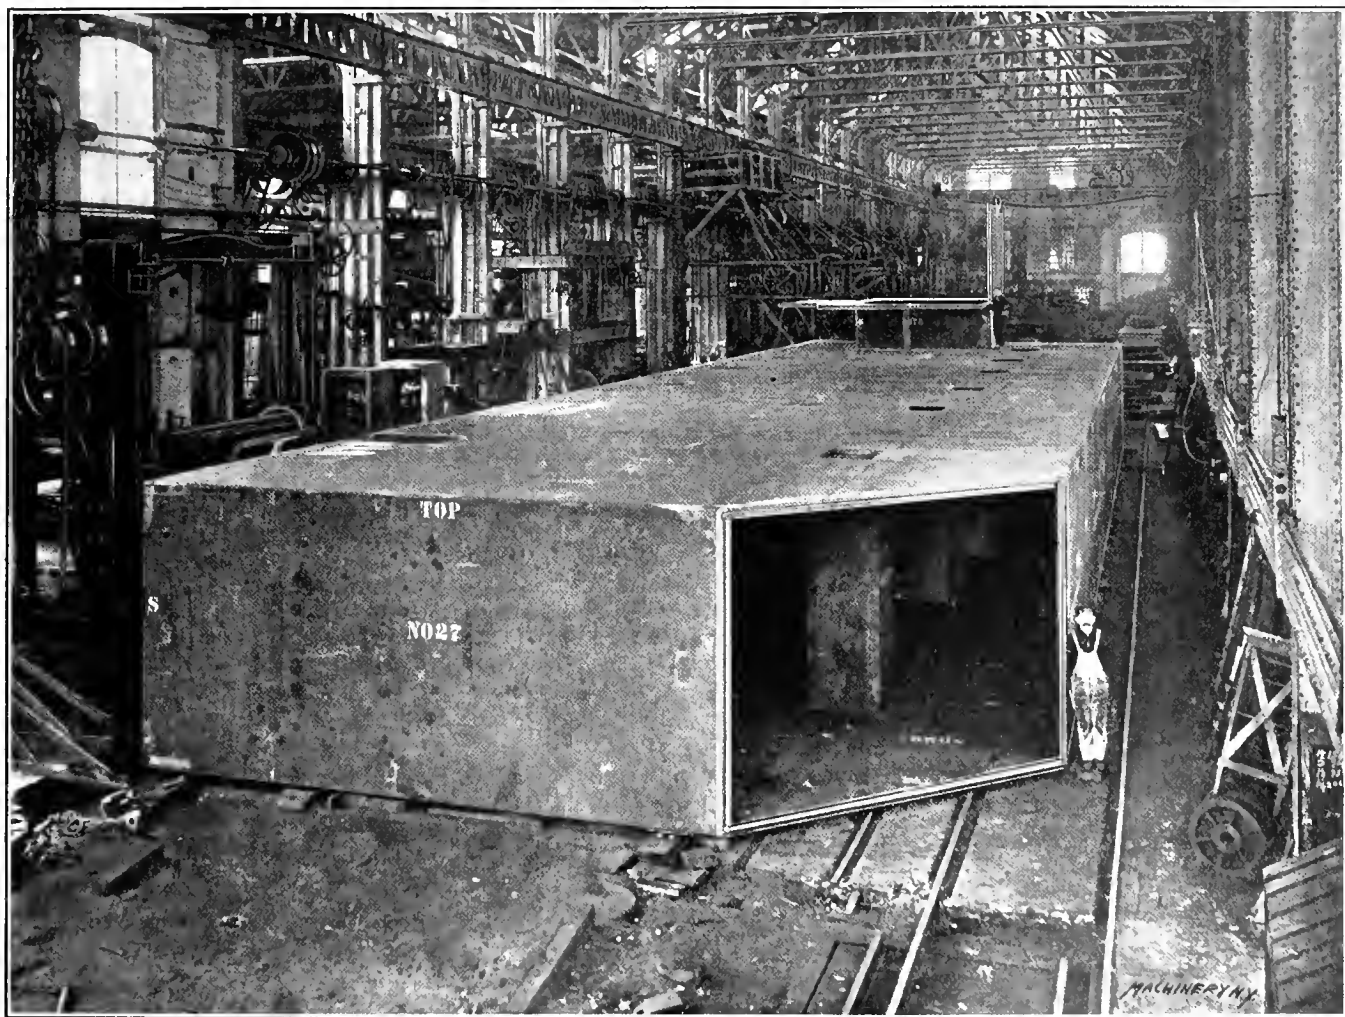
Lower Story of Vault, on Erecting Floor of the Armor Plate Shop of the Bethlehem Steel Works
